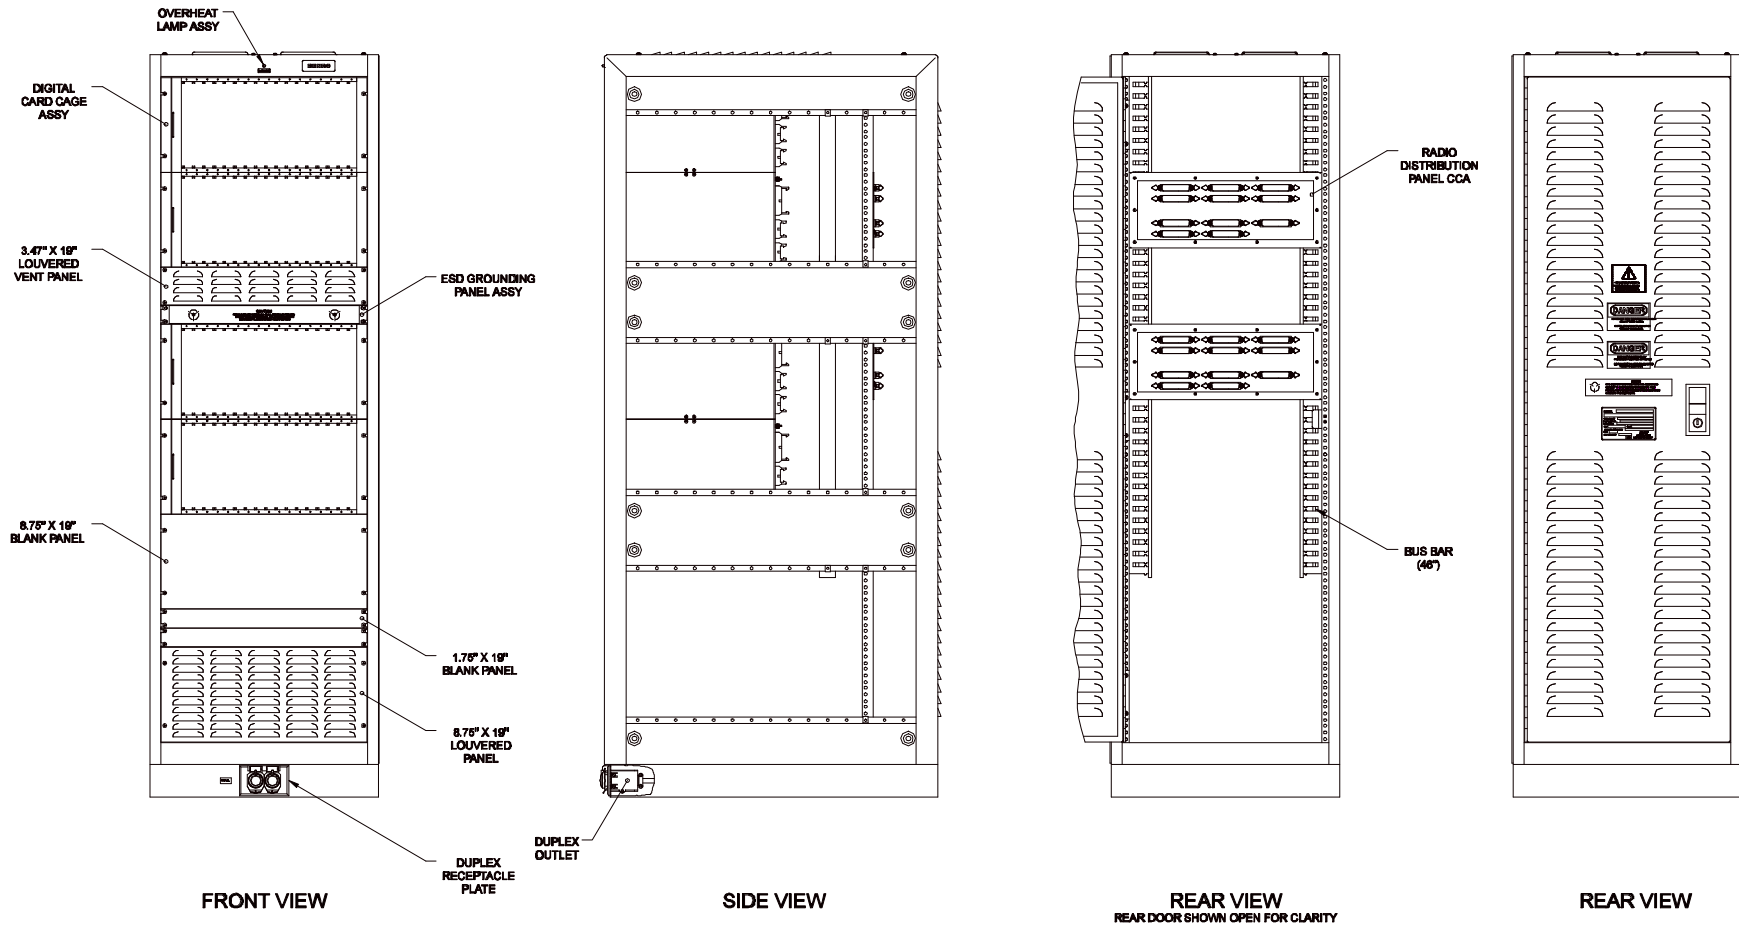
Basic ETVS System 3 (BS-3); Racks 1-4; Front, Side, and Rear Views (Sheet 4 of 4)
